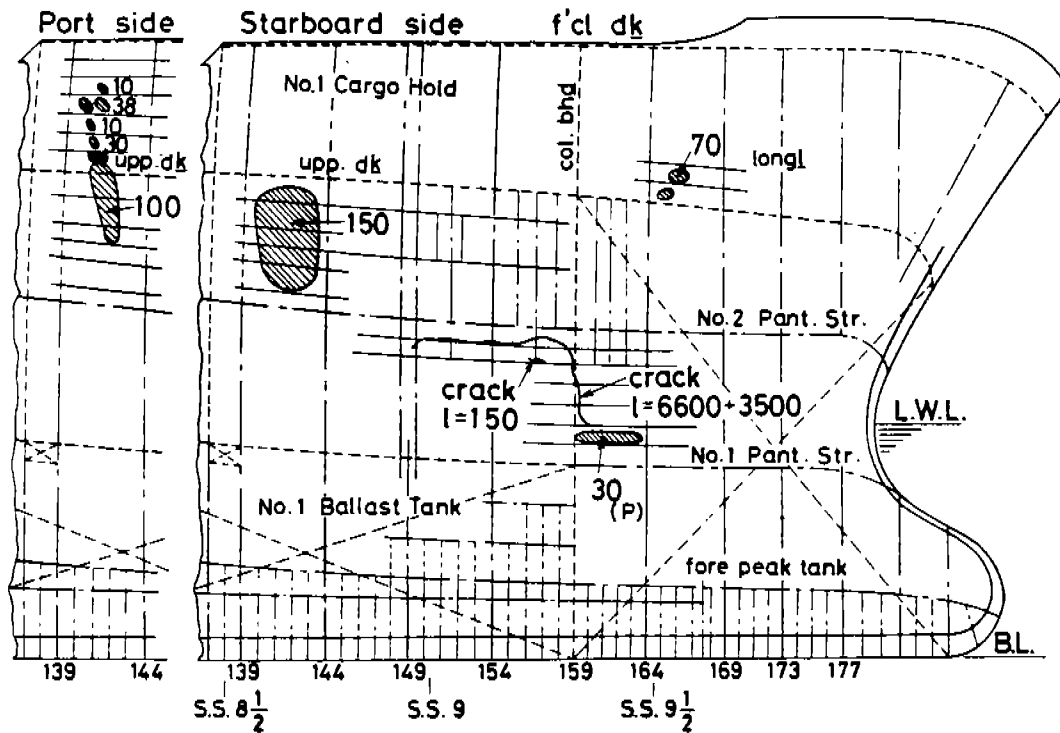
Shell Expansion and Fracture Location in the Containership Flare
